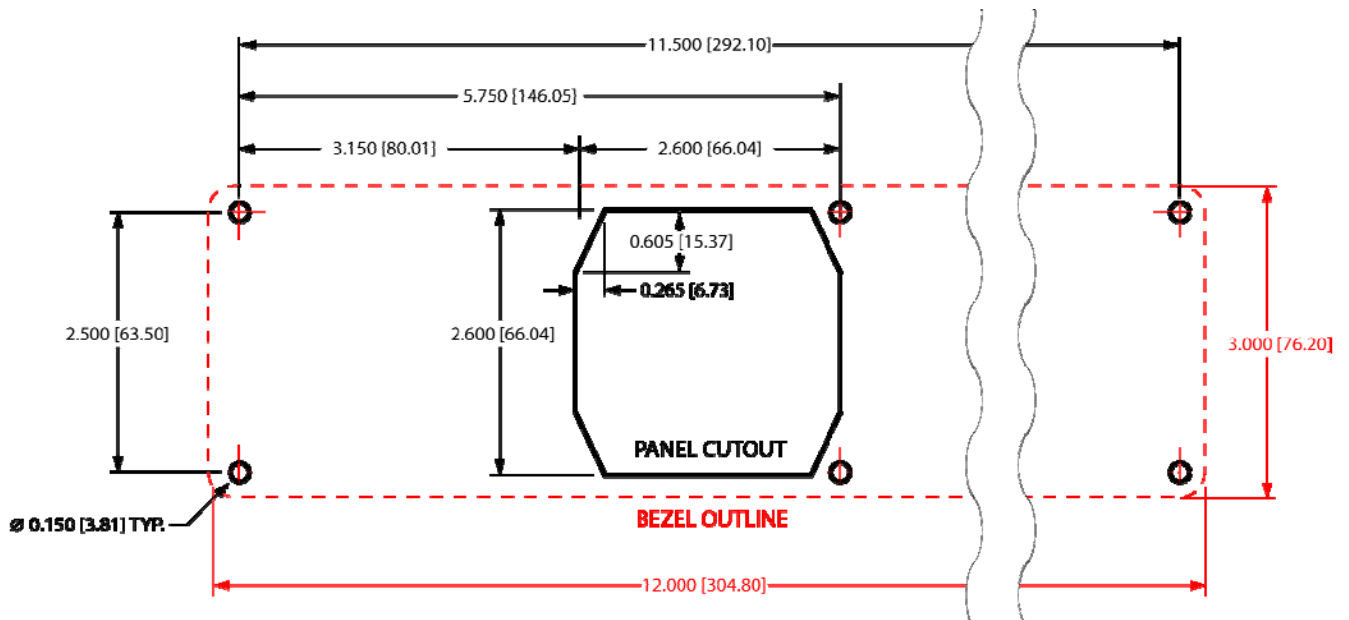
1Touch, 16 position installation dimensions in inches [millimeters].
